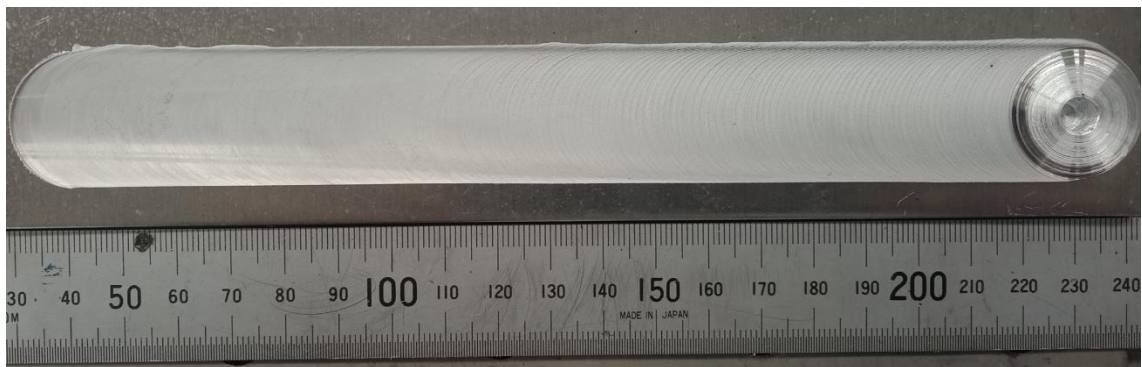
Photograph of defect-free FSL welded plate with little flash and characteristic hole or the weld end. AA2024 as top plate and the bottom plate as Ti6Al4V (veiled by the ruler).
